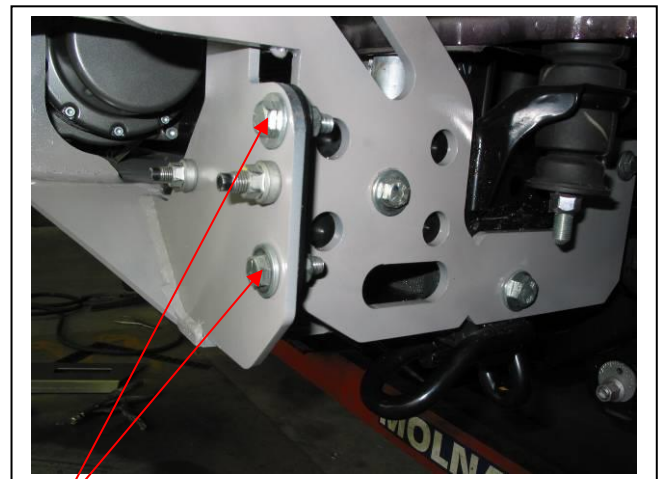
Shown levelling passenger side steel mounting bracket off front edge
